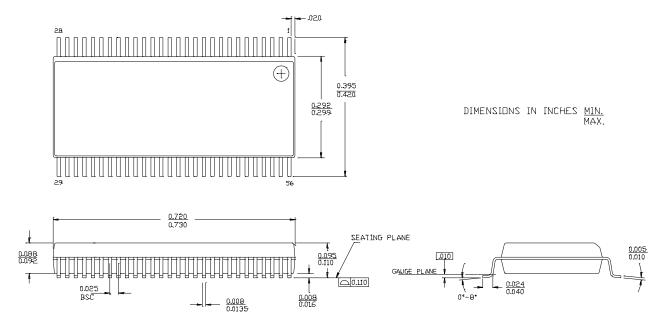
56-lead Shrunk Small Outline Package 056
